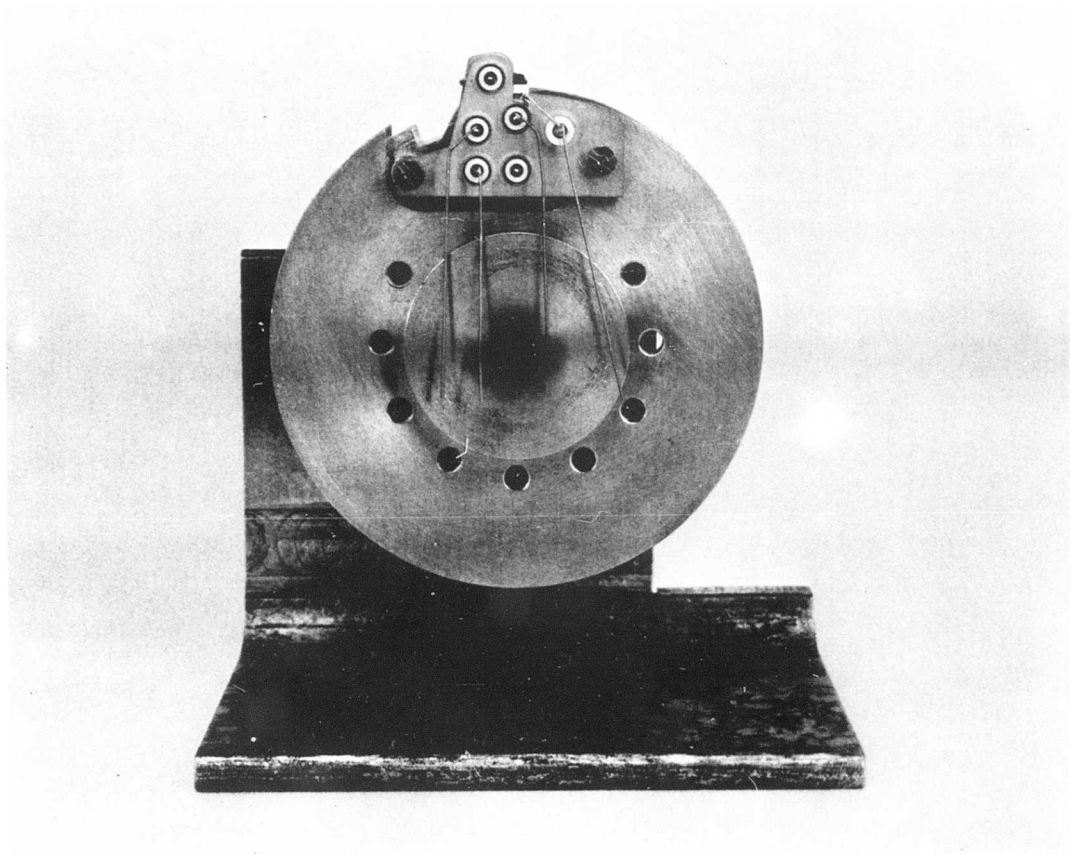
GUN SOLE ASSEMBLY - QKA851
